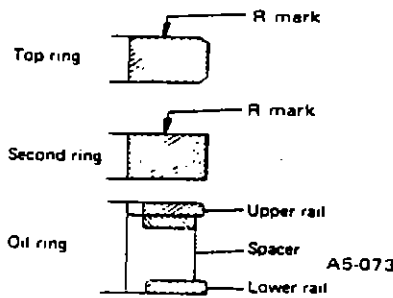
Cross section of piston rings (Riken Piston Ring)
